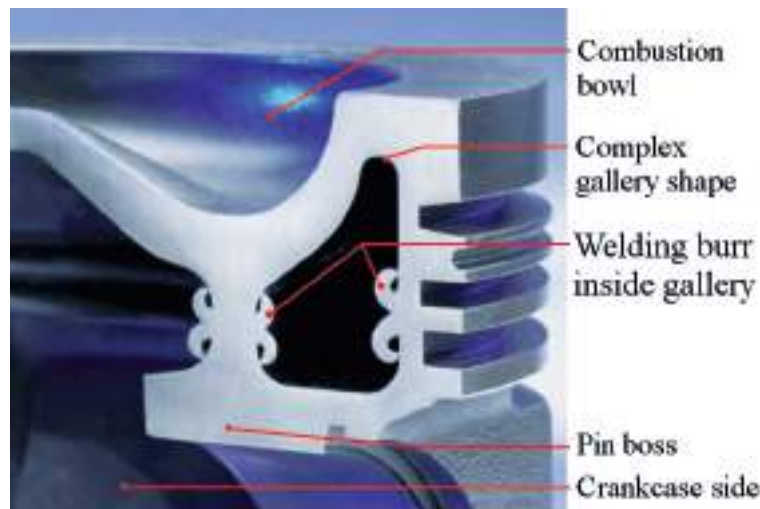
Cut view of common piston crown exposing gallery shape with manufacturing burr inside gallery
